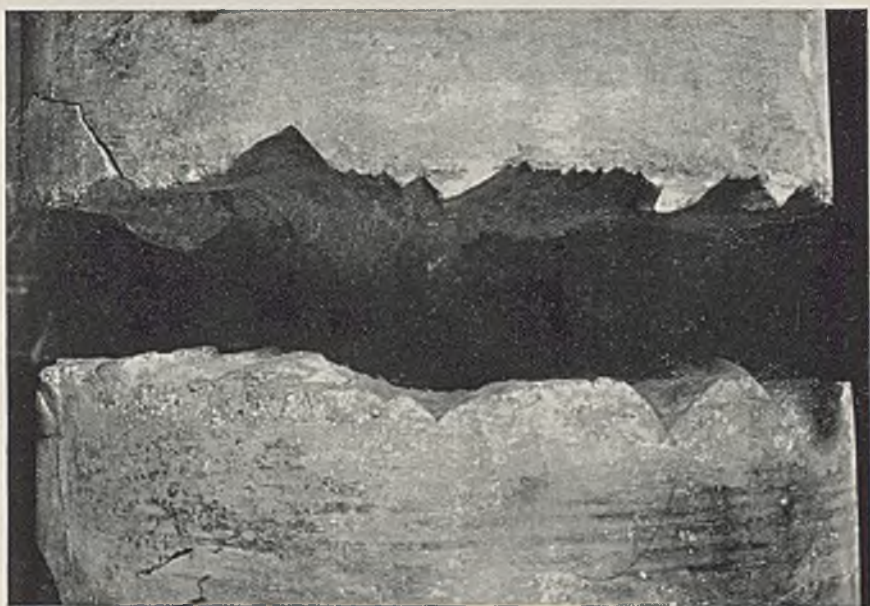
Serrated Edge of the Fractured Shaft shown in Fig. 9.
